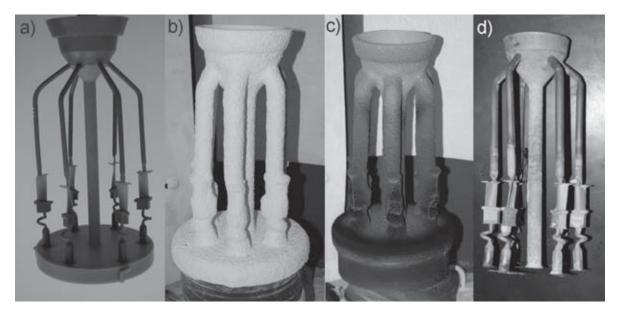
Application of wax models to manufacturing of monocrytal blades: a) wax model kit, b) ceramic form before casting, c) form in the stove after casting, d) monocrystal blades
